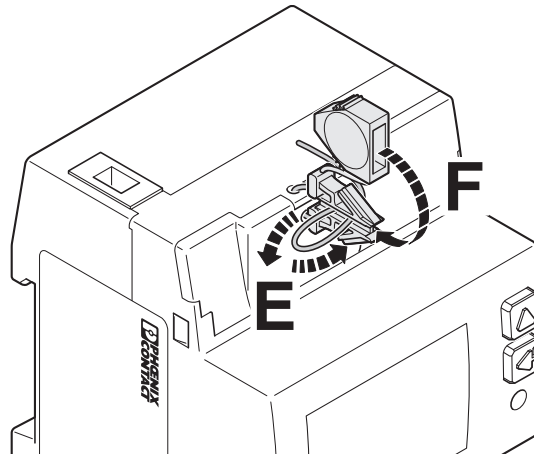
Guide the seal cord through both of the holes attach the cap
